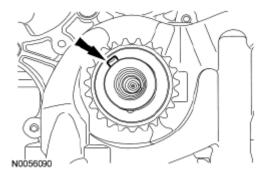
Locating Crankshaft Position Courtesy of FORD MOTOR CO.
